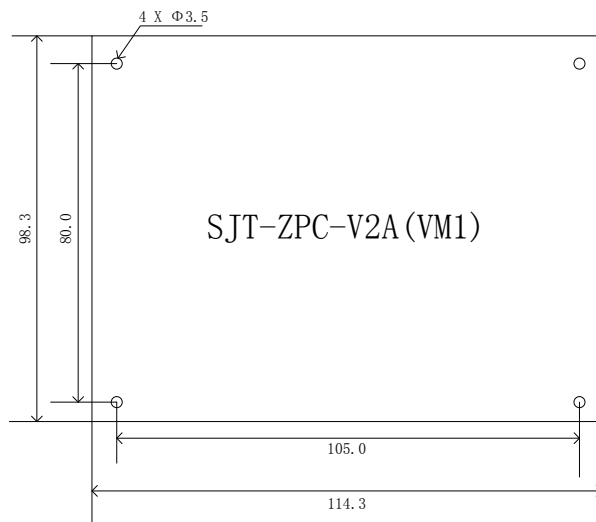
Dimensional Drawing of SJT-ZPC-V2A(VM1) (Unit : mm)
